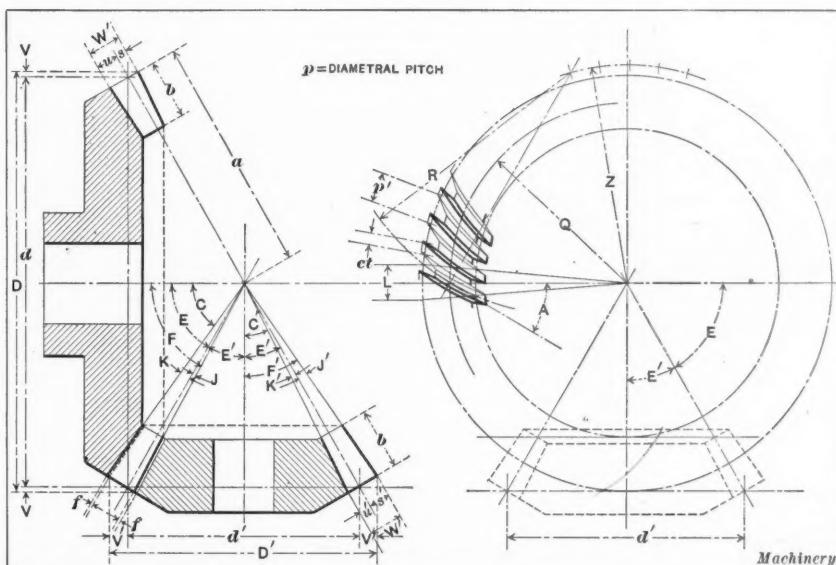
Typical Lay-out of Spiral Type of Bevel Gears
